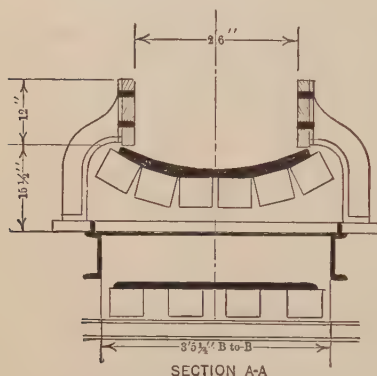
Continuous Skirt-boards for an Inclined Belt Conveyor.
